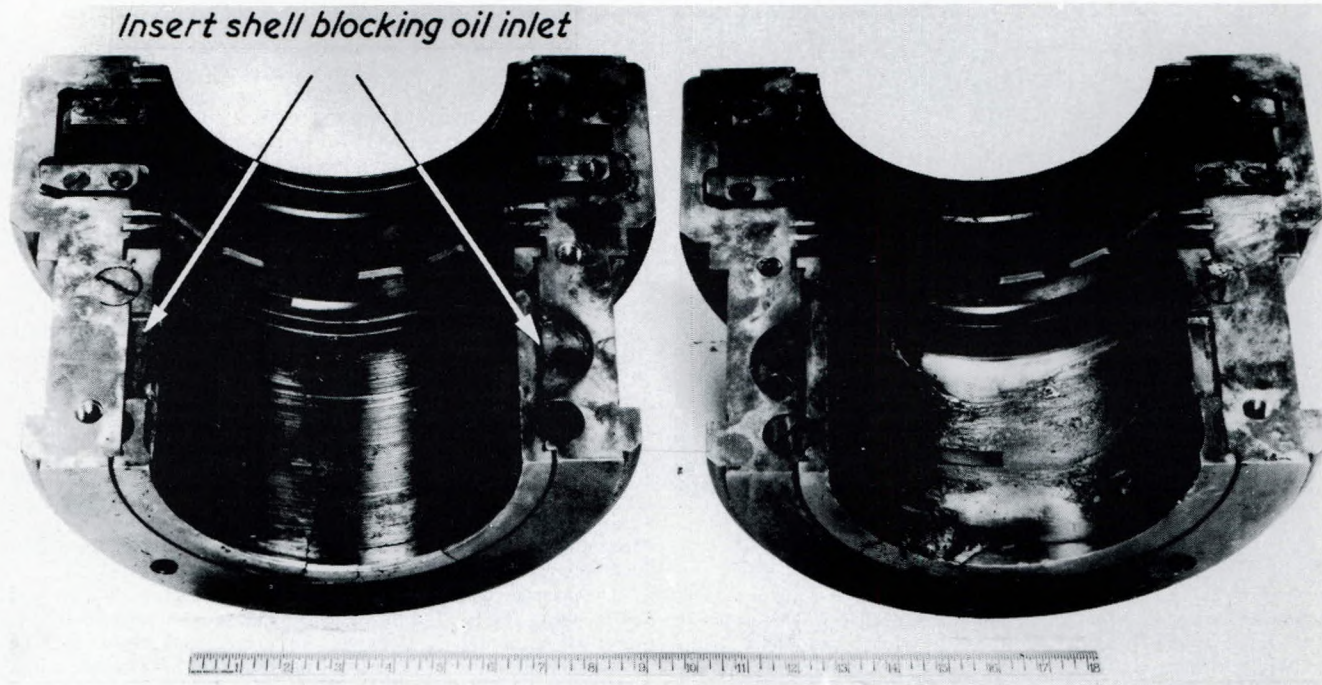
Kootenay pinion for 'd top (L) and bottom (R) bearing halves
